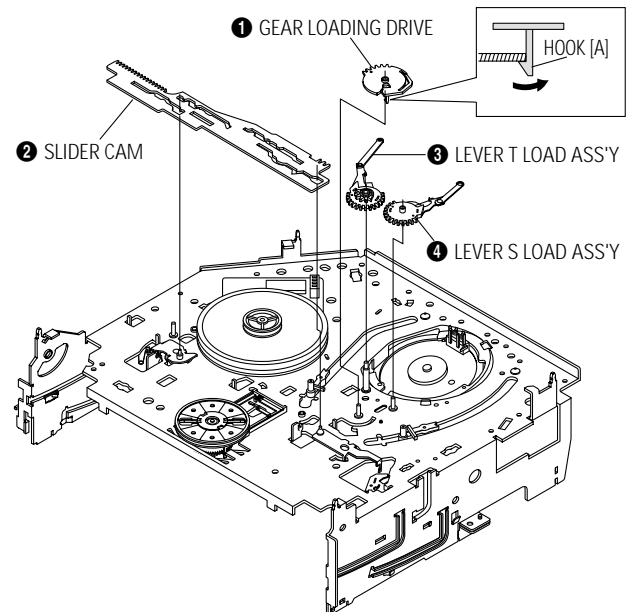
Gear Loading Drive, Slider Cam, Lever T, S Load Ass'y Removal
